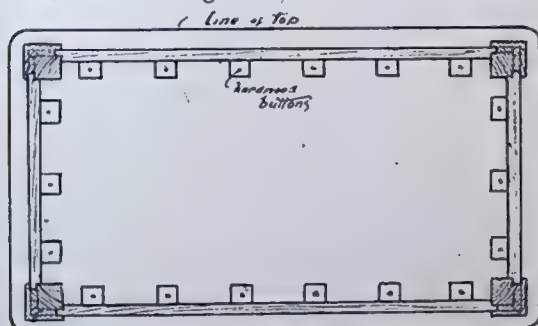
PLAN OF TOP, FROM UNDERSIDE, SHOWING CONSTRUCTION.
